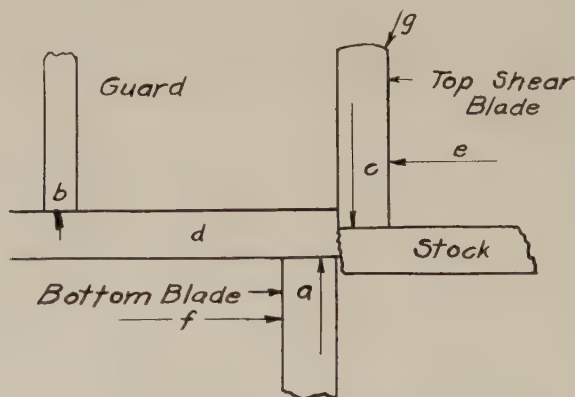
Illustrating the Action of Shearing Off or Cutting a Bar of Stock in a Mechanical Shearing Tool.
